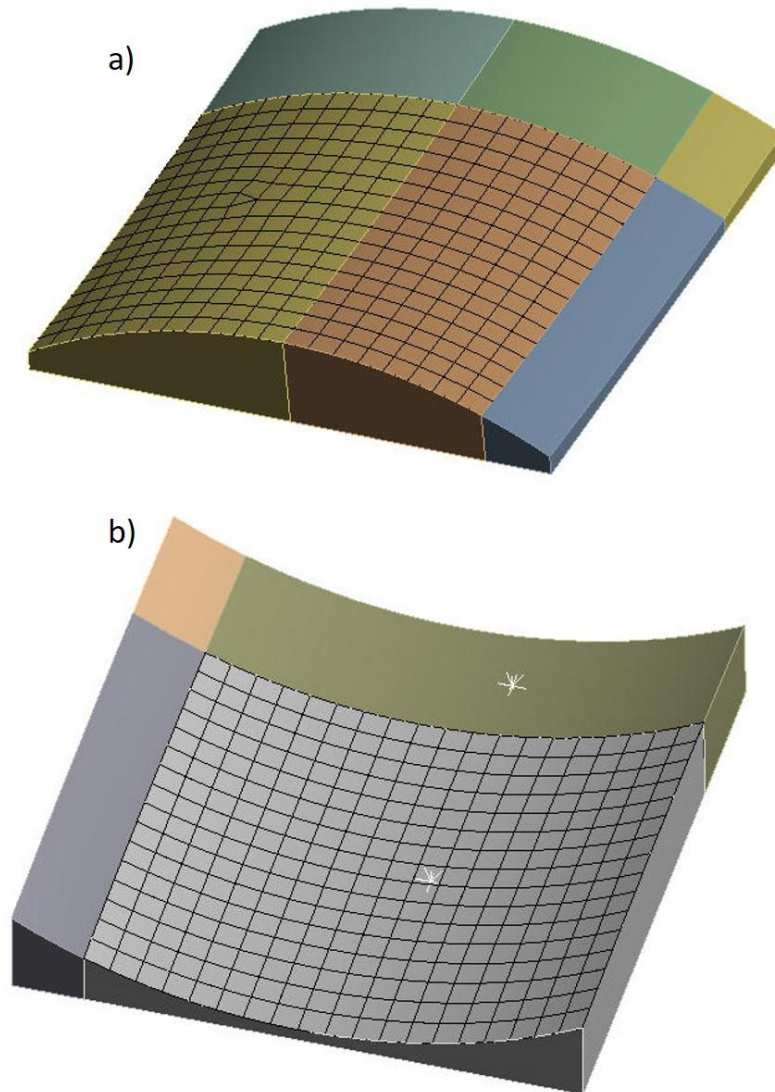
Isometric view of the a) top fixture, and b) bottom fixture with indication of initial mesh details.
